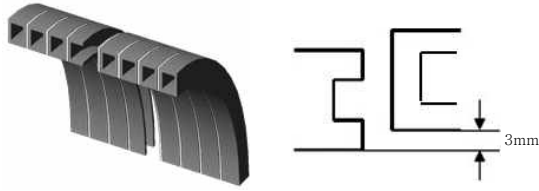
Cross-section shape of PE double wall pipe: case 2
